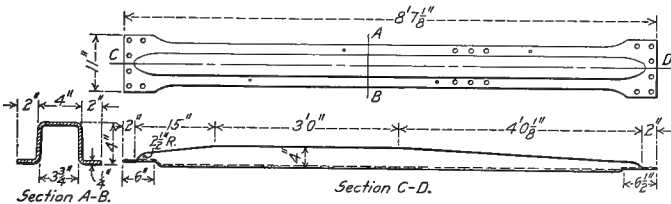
Pressed Steel Side Post Used on Pennsylvania Steel Frame Box Car Shown in Figs. 275 and 276.
